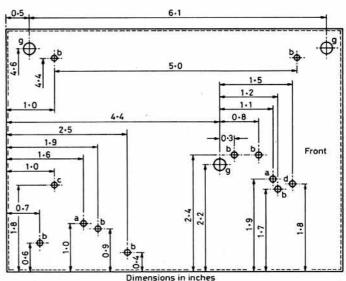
Top view of chassis (flanges underneath). (a) 6BA clearance hole for fixing pillar to top of chassis. (b) 6BA clearance hole for fixing pillar to underside of chassis. (c) 6BA clearance hole for clamping TR201 to chassis. (d) 6BA clearance hole for clamping IC301 to chassis. (e) 0 · 25in dia hole for grommet
